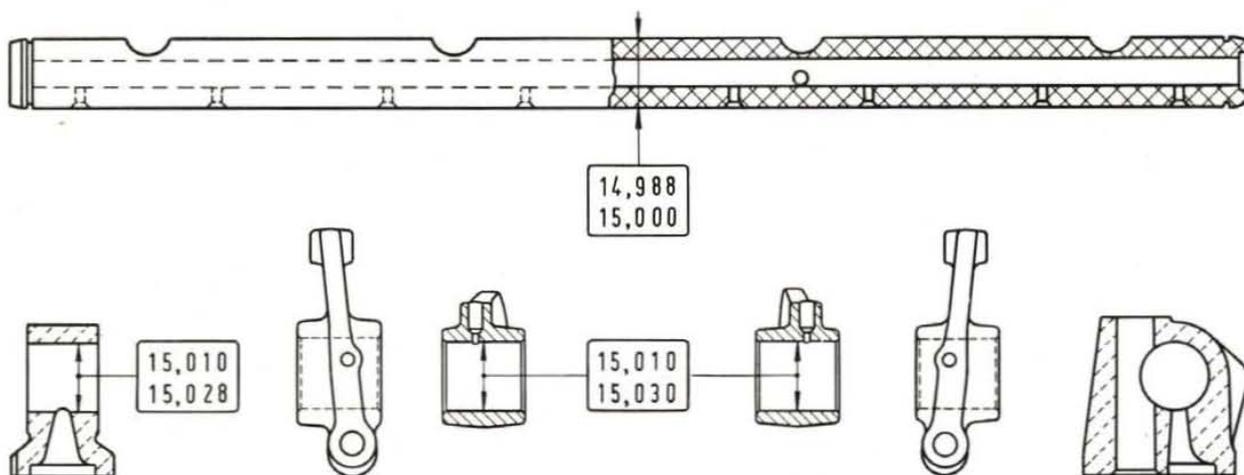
Critical dimensions (metric) of rockers, shaft and supports.
